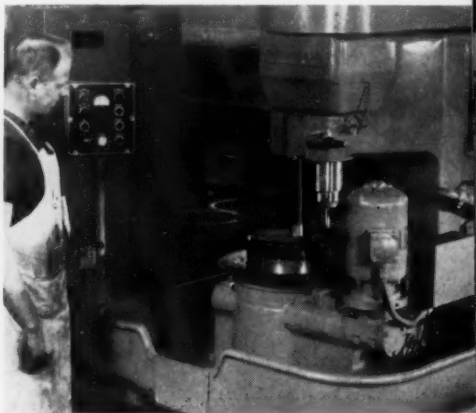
Vertical mill with magnetic index fixture for holding the parts shown in Fig. 9.
